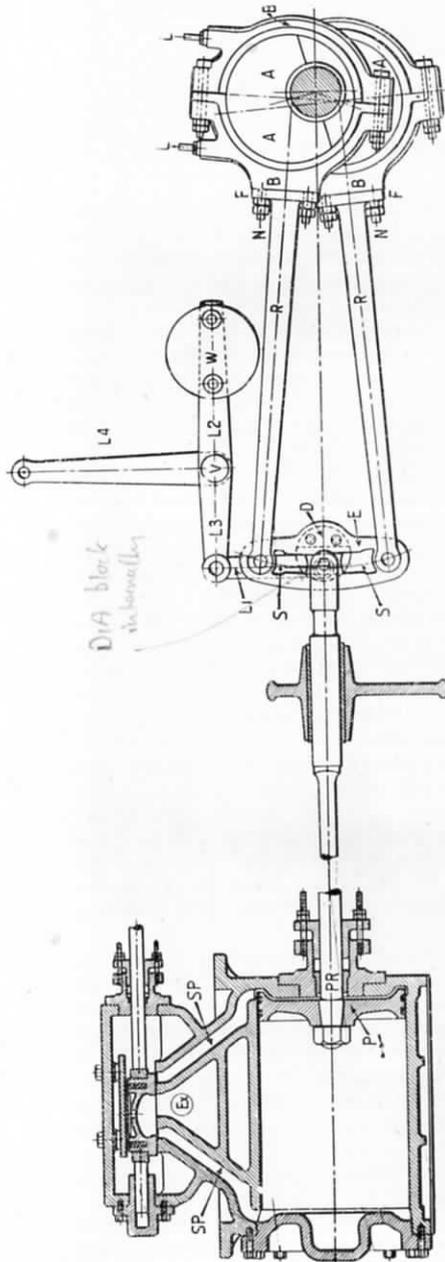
STEPHENSON LINK-MOTION VALVE GEAR.
